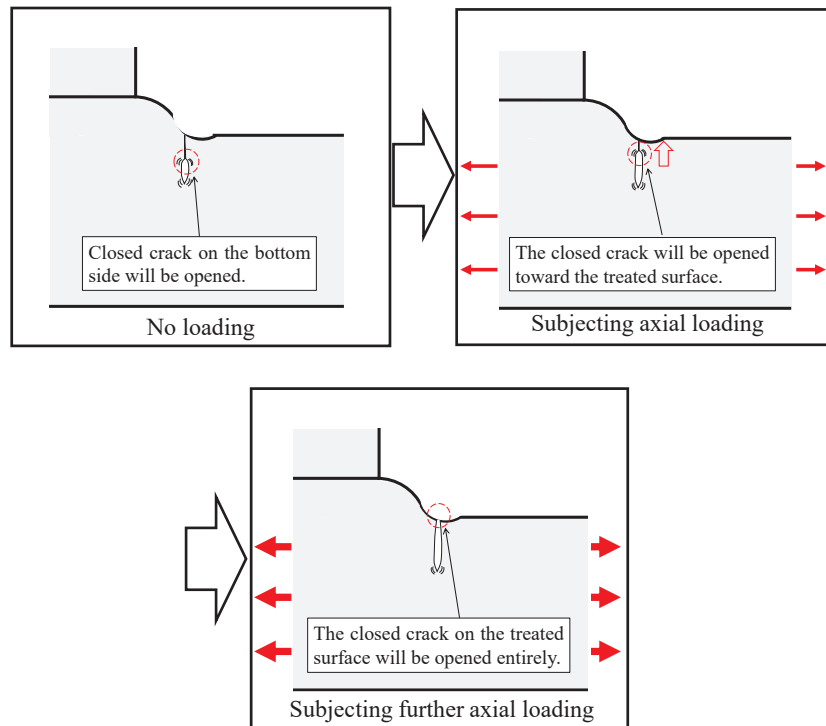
Identified crack opening-closing behavior on pre-fatigue welded joints treated by HFMI
